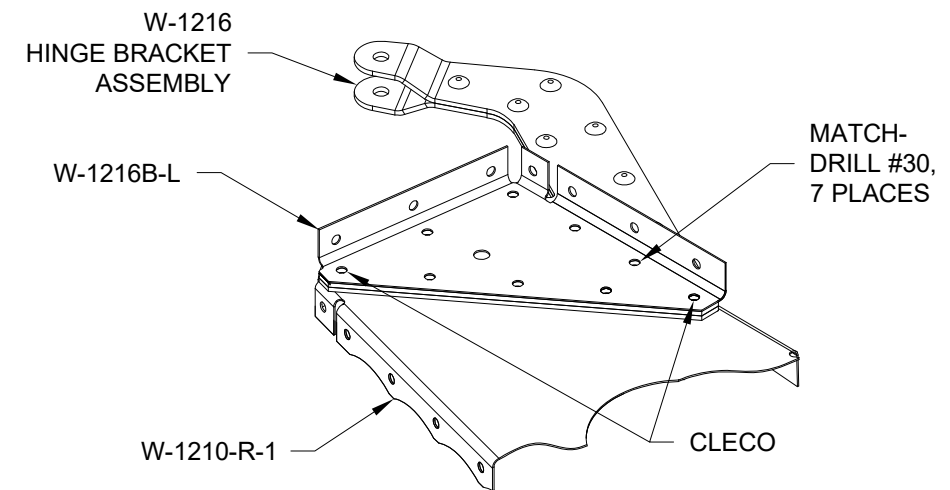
MATCH-DRILLING THE FLAPERON HINGE BRACKETS AND MAIN RIBS
